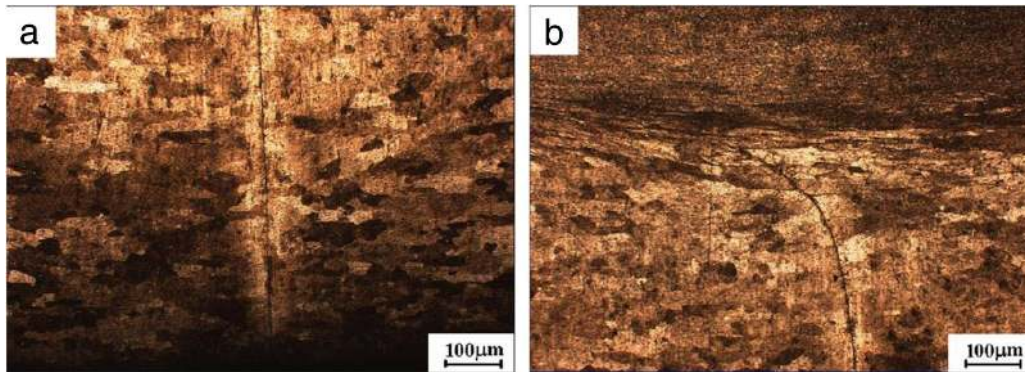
FSW of AA2219-T6 showing (a) straight partial bonding root defect (b) crack like root defect curving together with the TMAZ [126].
